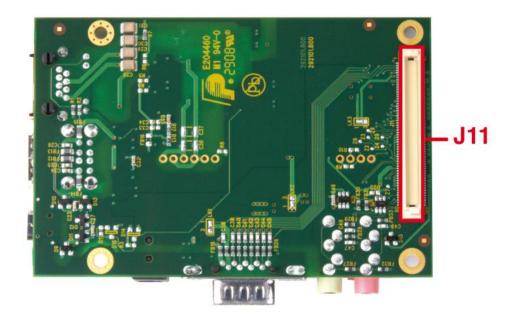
REDCONN CONNECTOR LOCATIONS – BOTTOM SIDE
